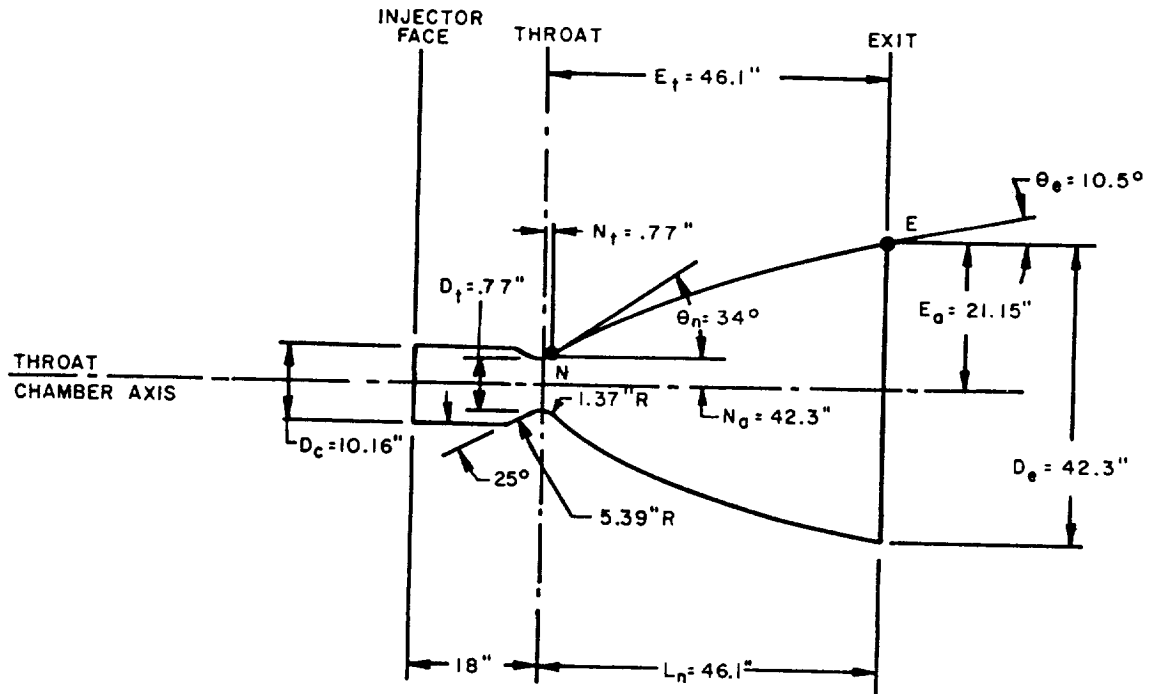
A-4 stage engine thrust chamber, internal configuration layout:
